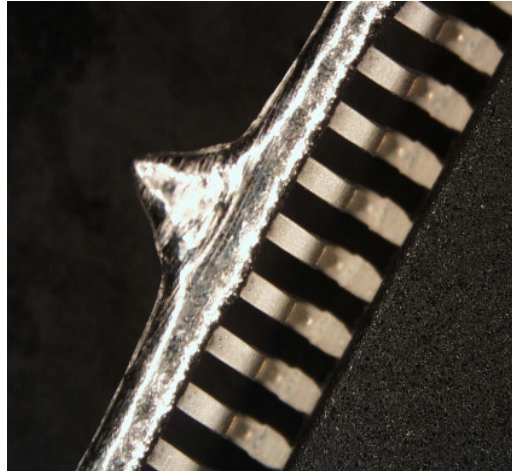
QFP leads with SAC305 solder not wetting at 221°C [42]
